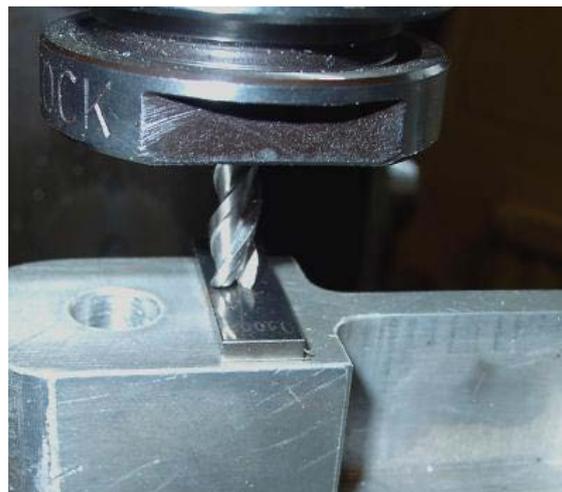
Using a slip gage when touching Z offset on a mill
